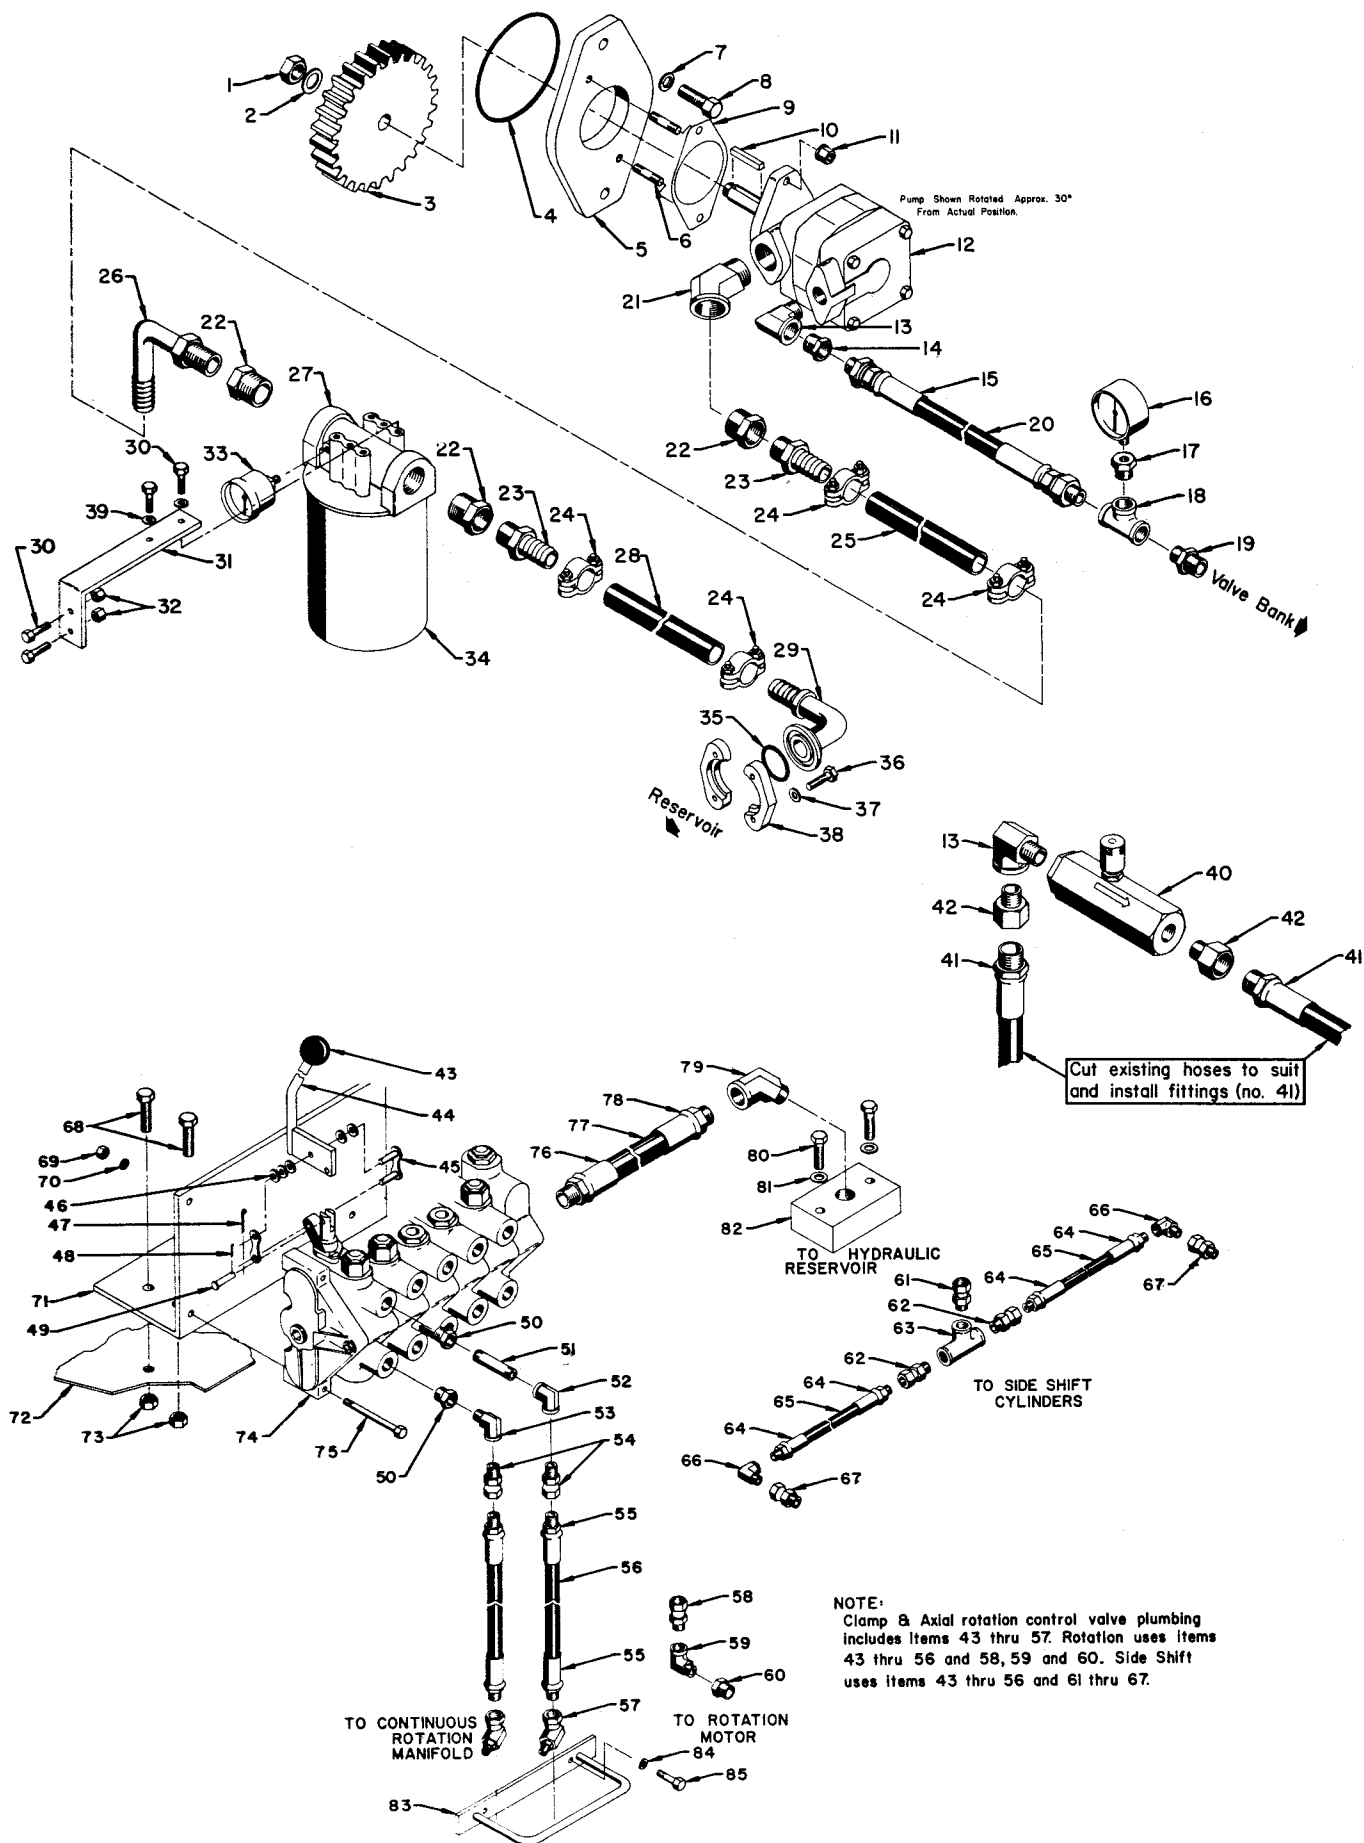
Hydraulic Installation Kit - 966 Caterpillar Loader (Part Number 91702748)
